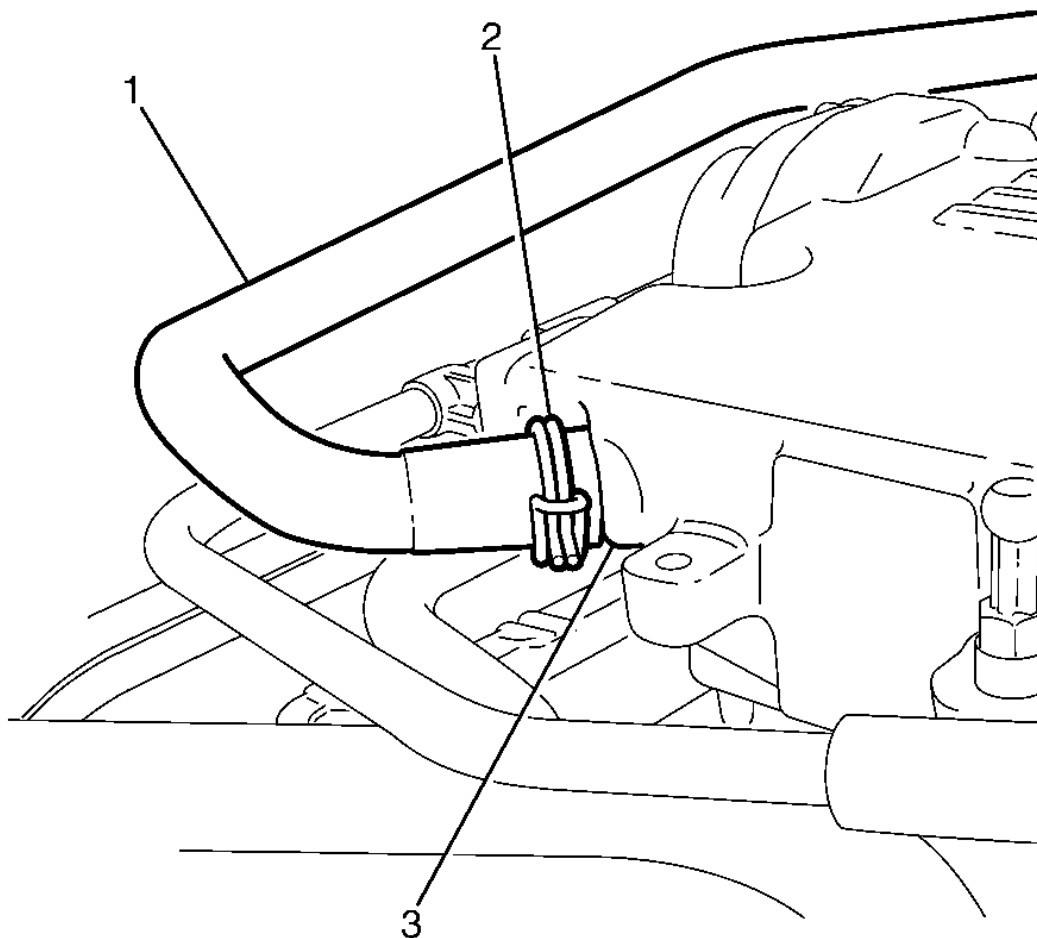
Identifying Heater Outlet Hose, Heater Outlet Pipe Quick Connect Fitting & Retaining Clip
